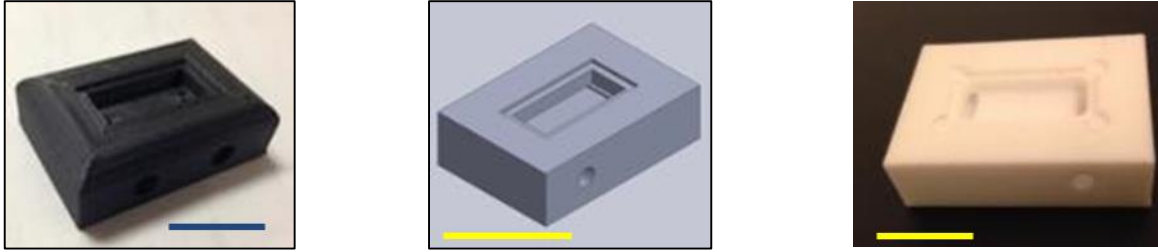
Design and fabrication of a new, more cost-effective sample holder. USF SiC Group 3D printed nylon cell (Left), solid-works schematic (center), the sample holder machined out of Teflon by the USF engineering machine shop (right). The scale bars have the length of 2 cm in all the images.
